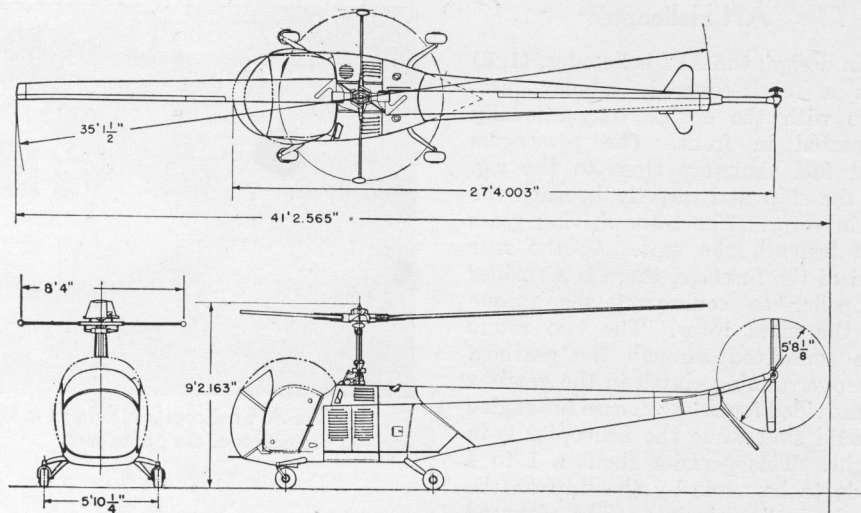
Three-view drawing with principal dimensions of the commercial model 47-D.
